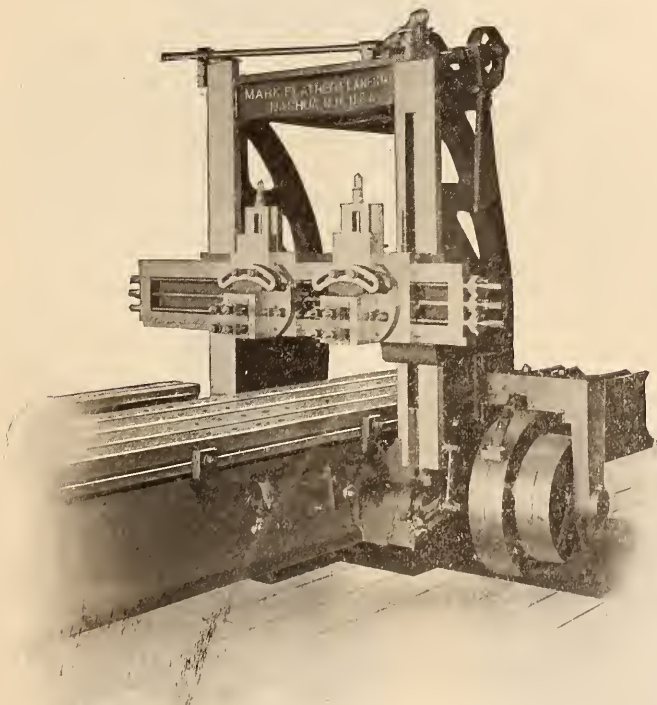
STANDARD PLANER WITH OPEN-SIDE ATTACHMENT—FRONT VIEW AS A STANDARD PLANER—MANUFACTURED BY FLATHER PLANER CO., NASHUA, N. H.
